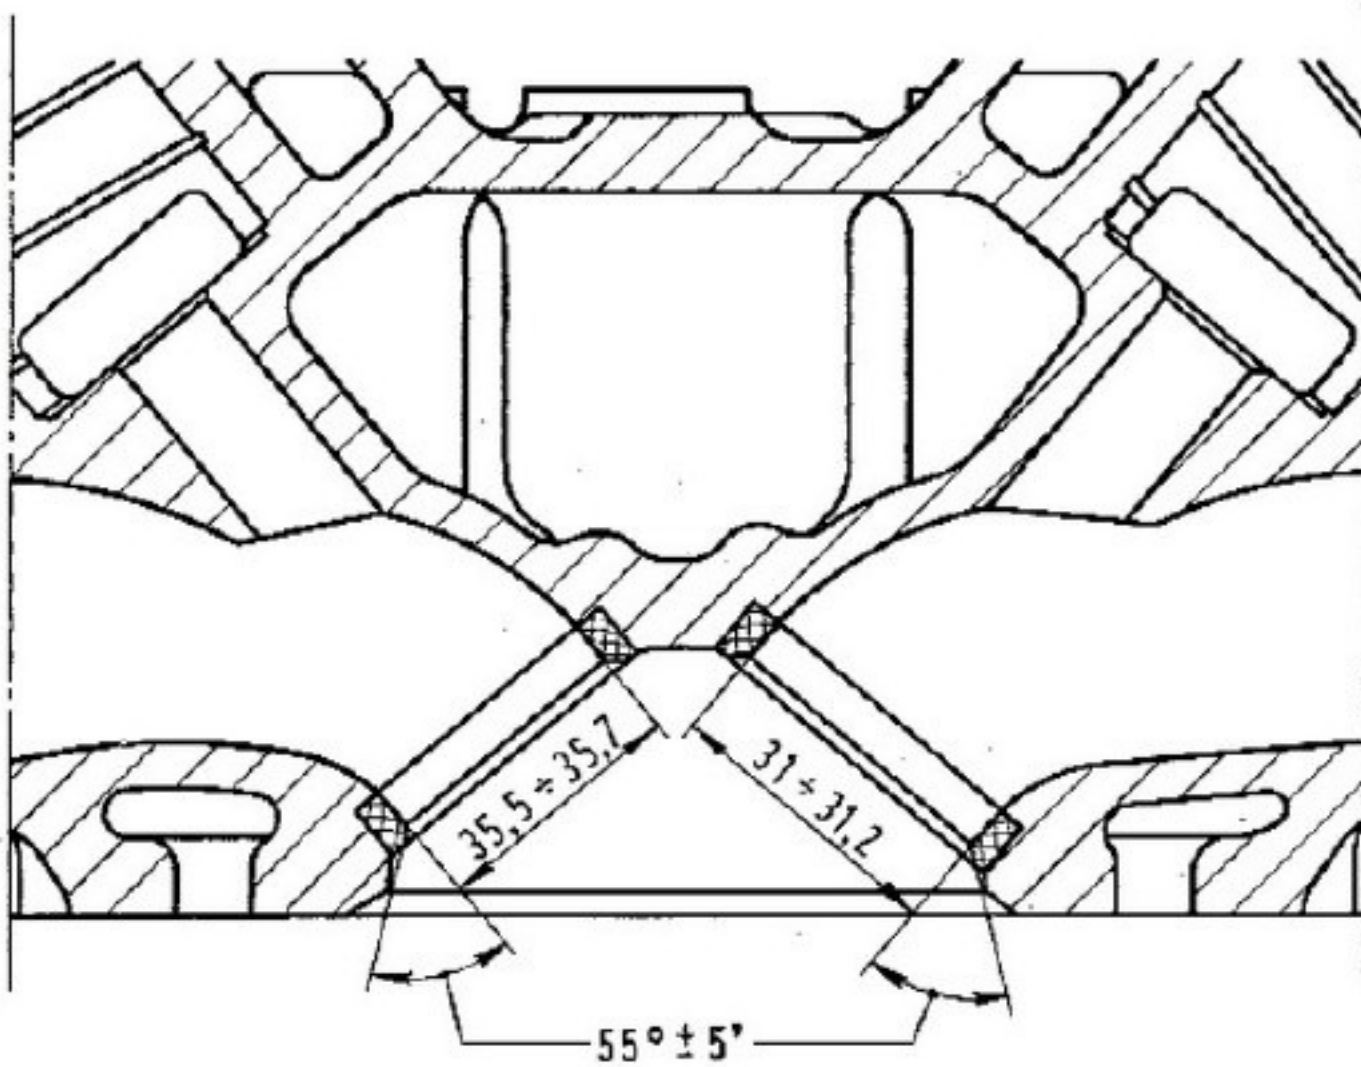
Cylinder head section on valve seats of one cylinder.
